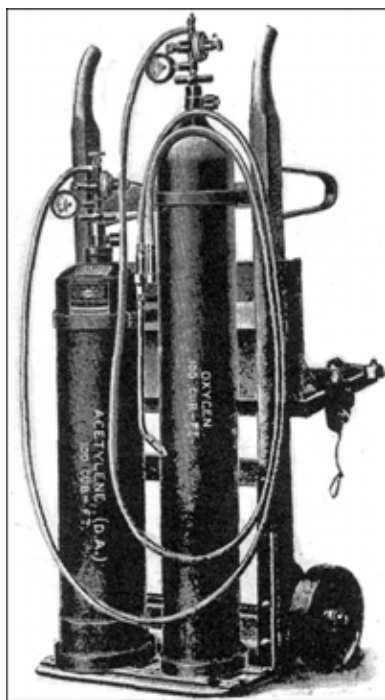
Mobile equipment for gas welding and brazing (1916)
